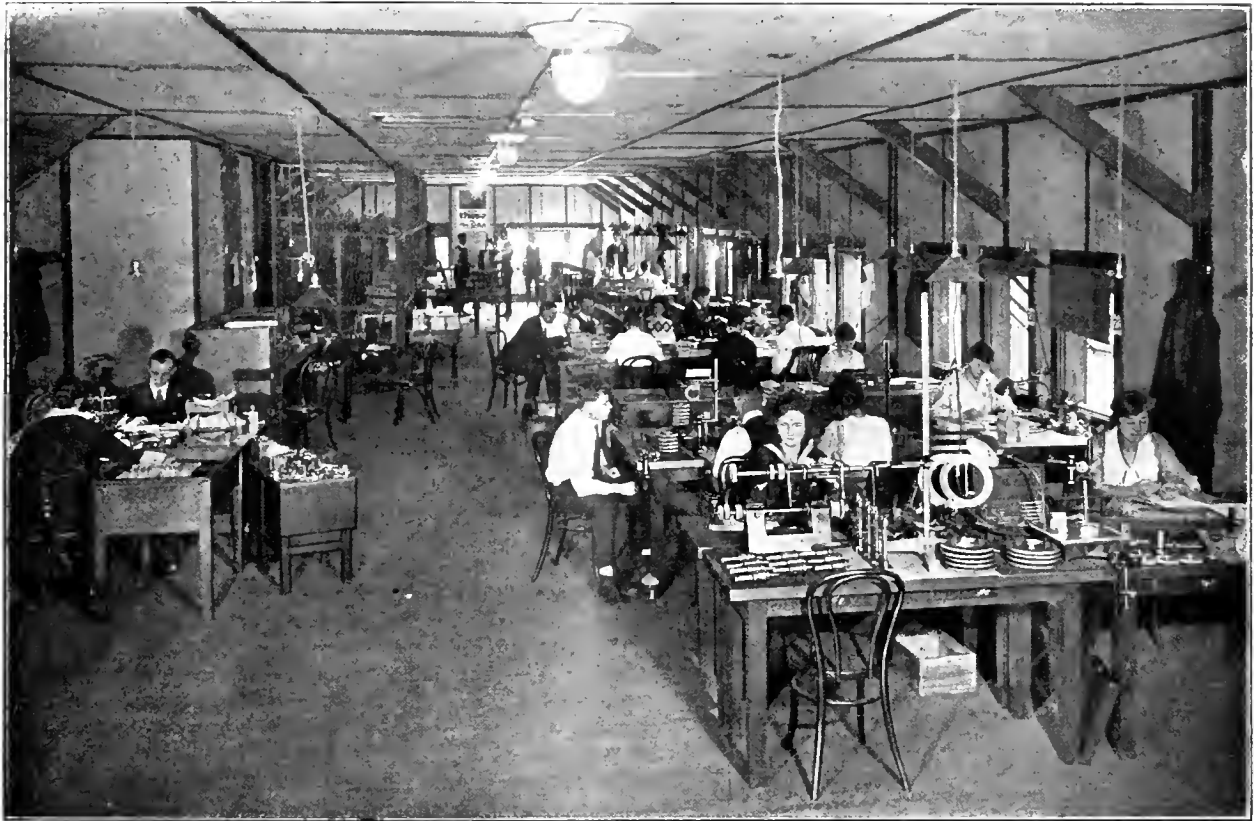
GAGE LABORATORY, BUREAU OF STANDARDS, WASHINGTON, D. C.
